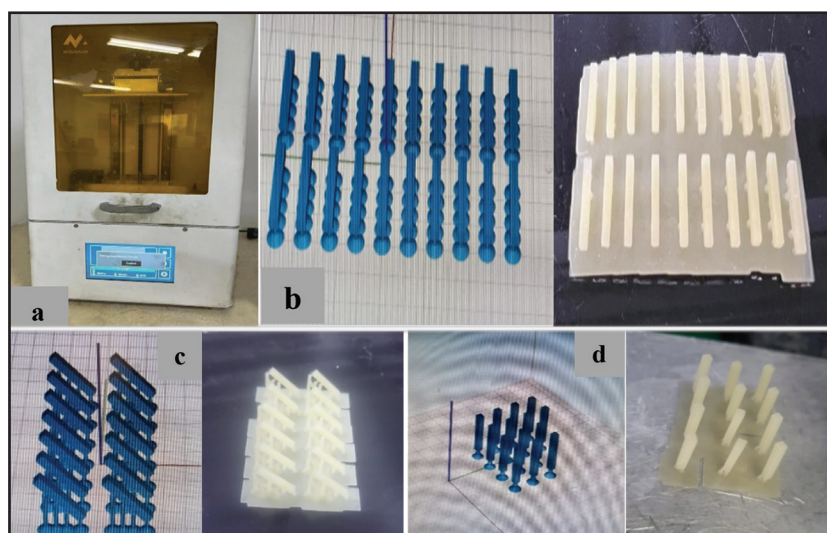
(a) DLP 3D printer used in the study (Mogassam, Cairo, Egypt), (b) Bar-shaped specimens printed with an angle of 0-degree, (c) Bar-shaped specimens printed with an angle of 45-degree, (d) Bar-shaped specimens printed with an angle of 90-degree.
